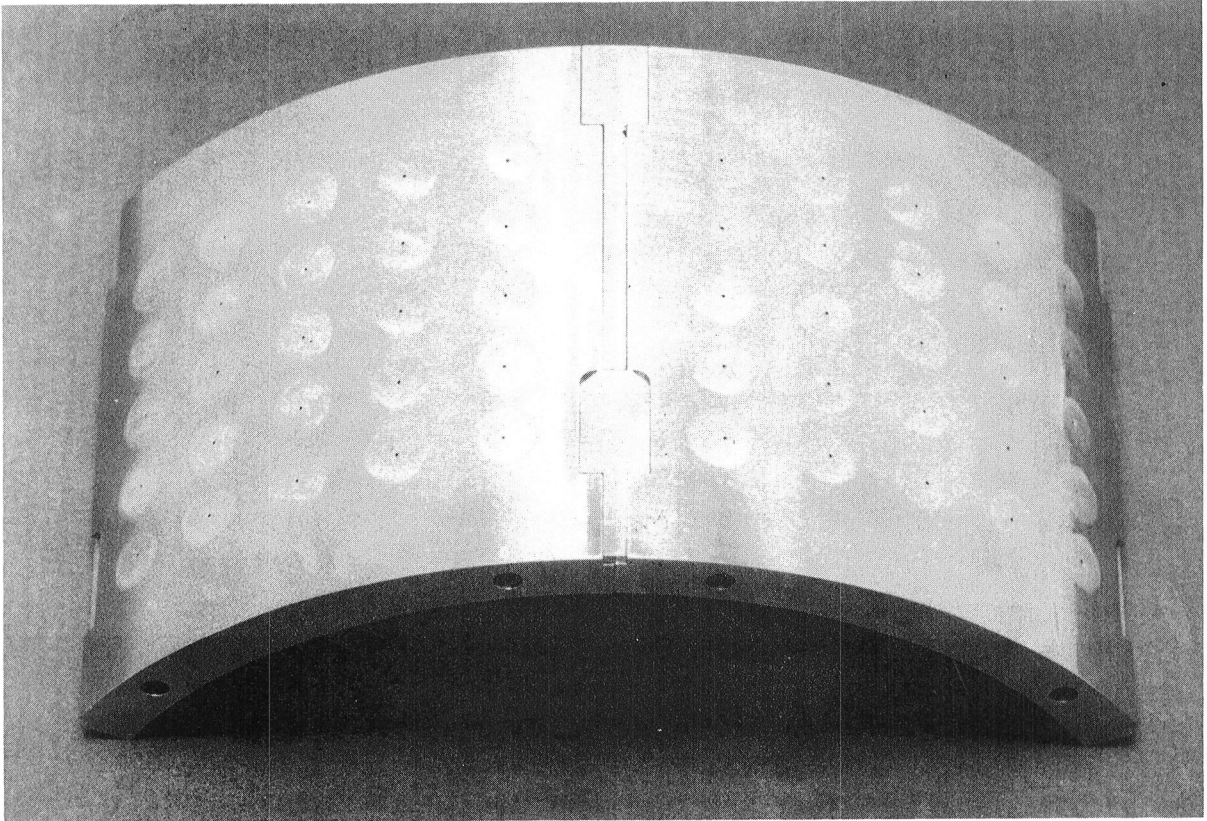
Two 25 Hole Pads Showing Exterior Inserts
